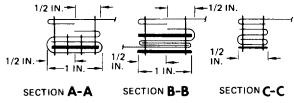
Normal gore section replacement details, typical (sheet 1 of 2)
